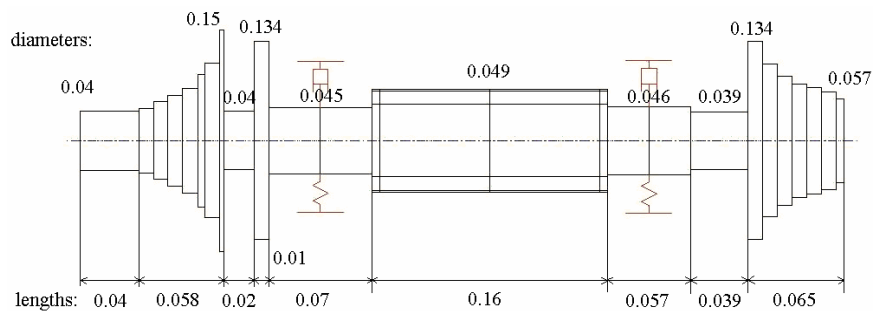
Beam-like model of the experimental solid-steel rotor shaft with a designed high-speed PM rotor structure and dimensions [m] of the geometry.
